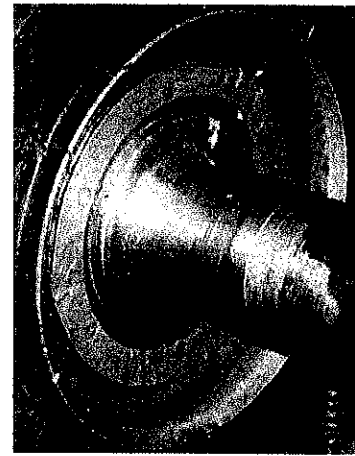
Cork Washer, Brake Flange Plate, Thrust Washer, Bearing Spacer, showing rotation of assembly
